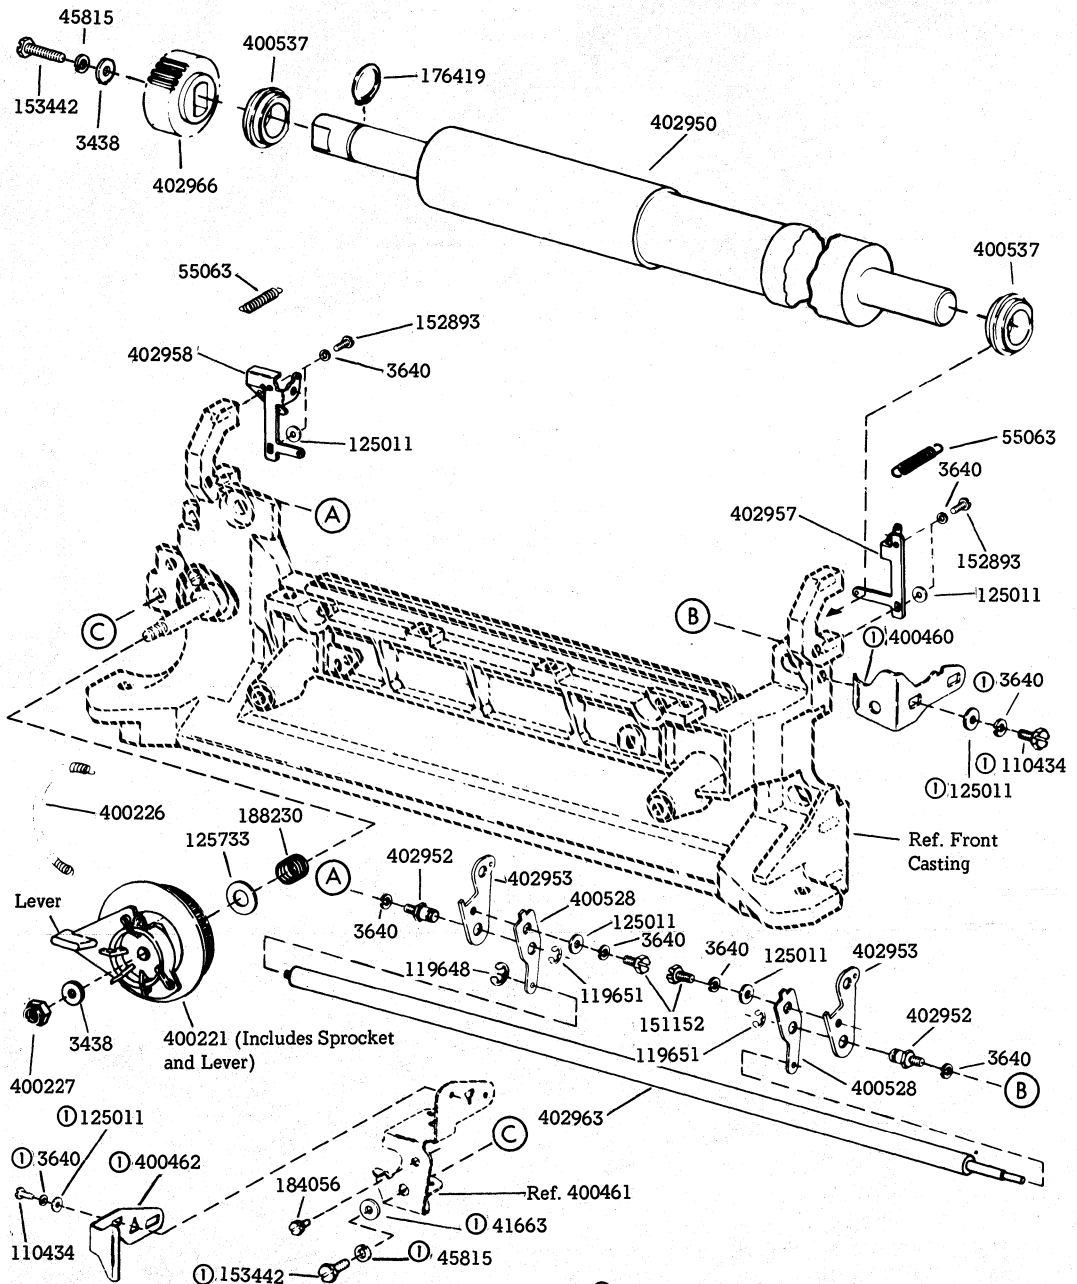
Front Casting Assembly (Friction Feed 40P102)
